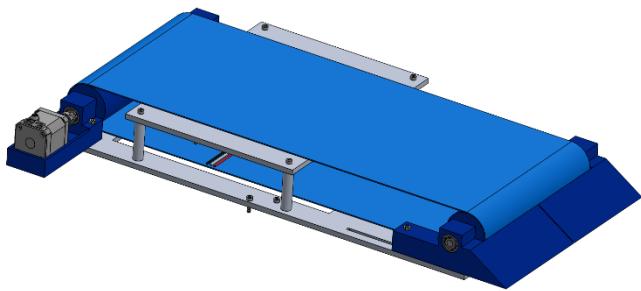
SolidWorks rendering of the fully-assembled printer modification assembly.
